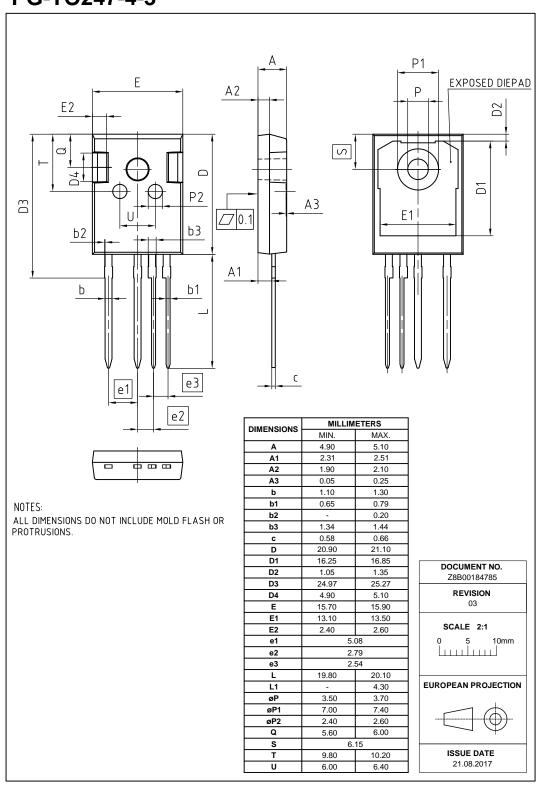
Outline PG-TO 247-4-3, dimensions in mm - Industrial Grade
